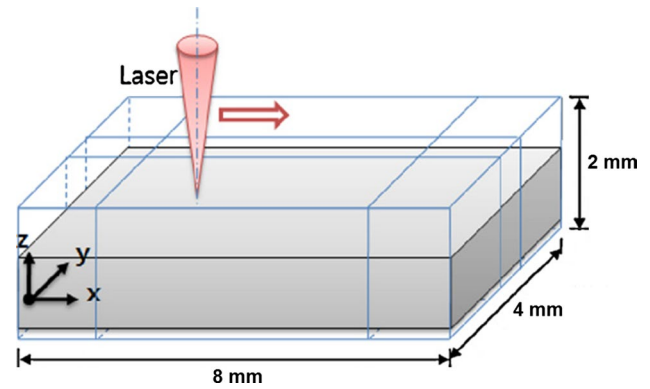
Schematic view of the laser welding simulation (adapted from Cho et al. [6])
